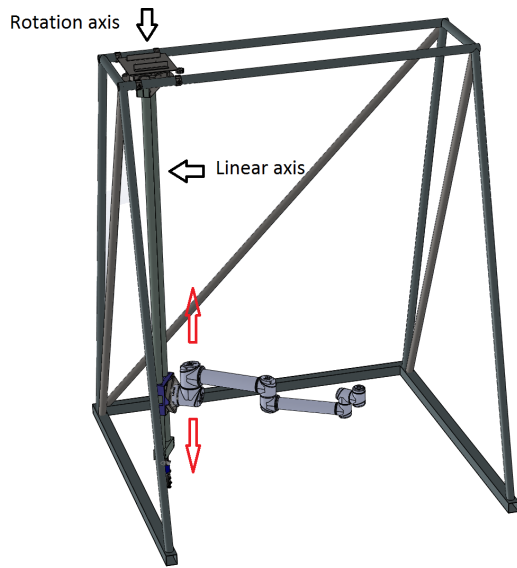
A CAD model of the linear axis and rotational axis assembly. A support frame was made to be able to suspend the assembly from the "ceiling".
